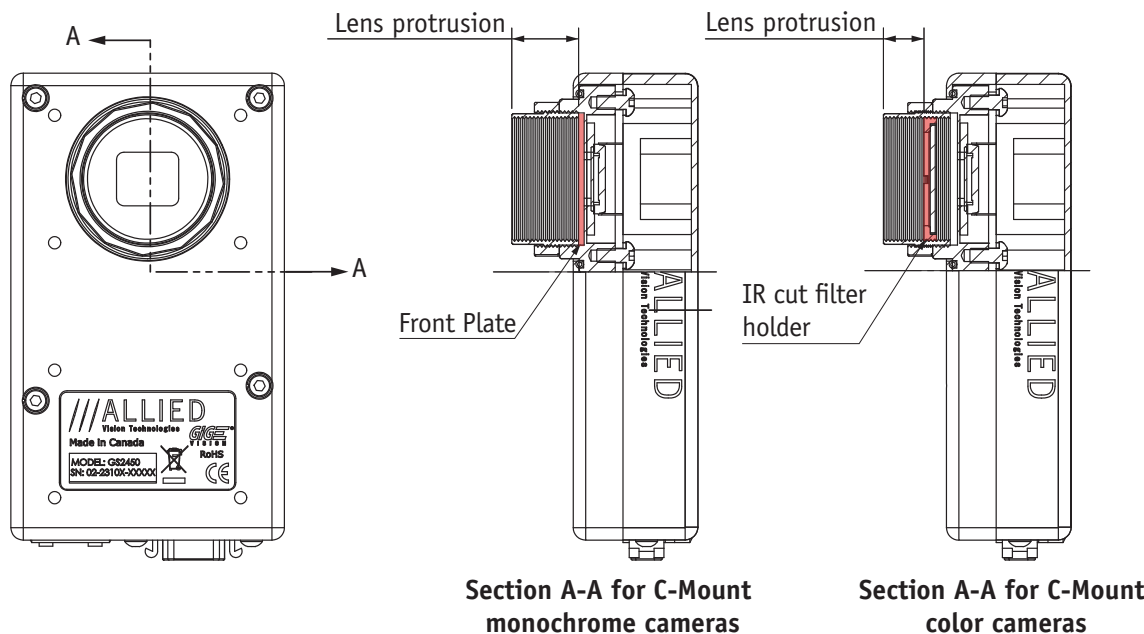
Cross section of typical Prosilica GS assembly with C-Mount
